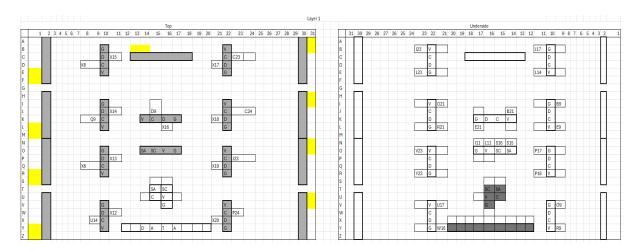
PCB Schematic for the upper Mk.3 PCB
